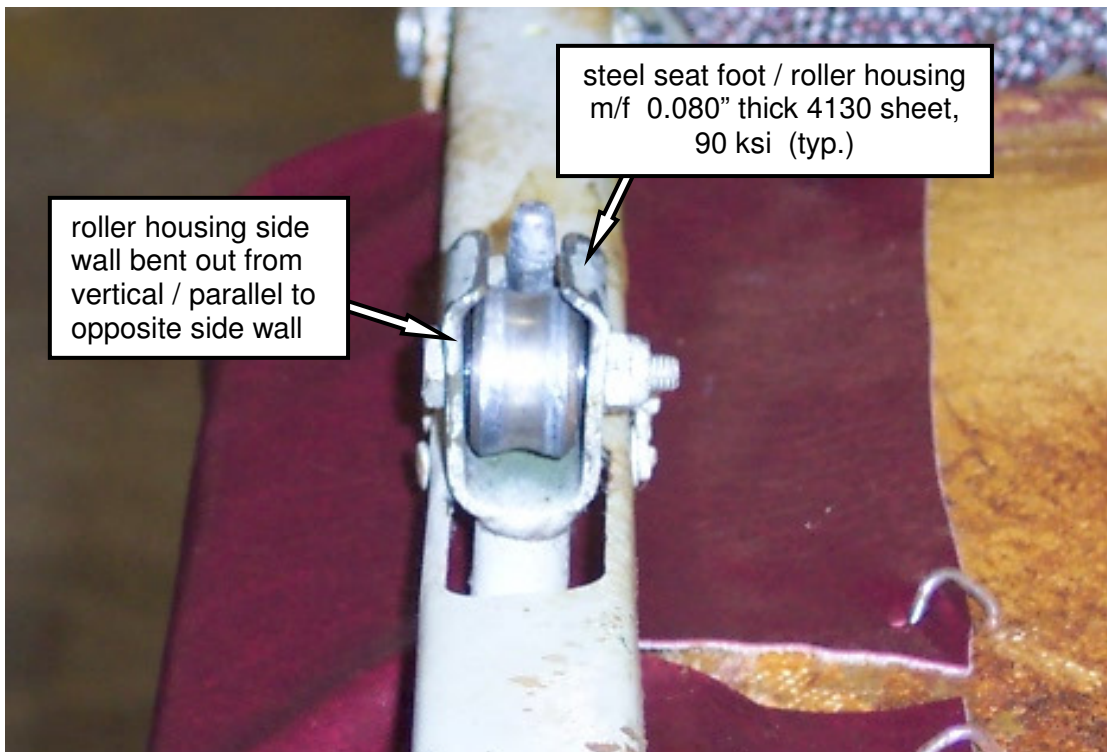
DETAIL OF DEFORMED / BENT SEAT ROLLER HOUSING
